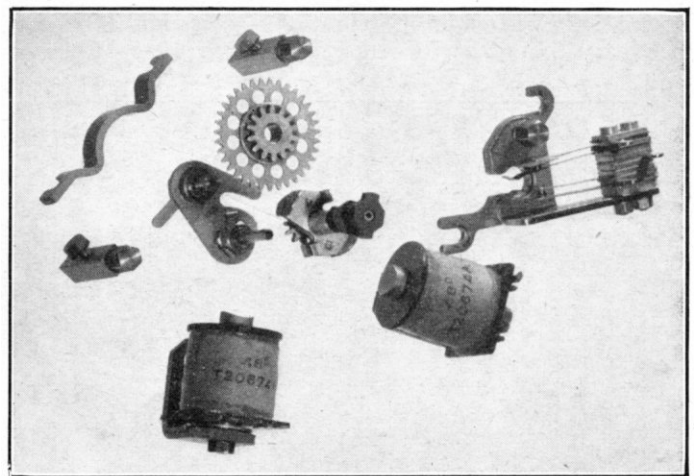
EXPLODED VIEW OF MOTOR MECHANISM.
